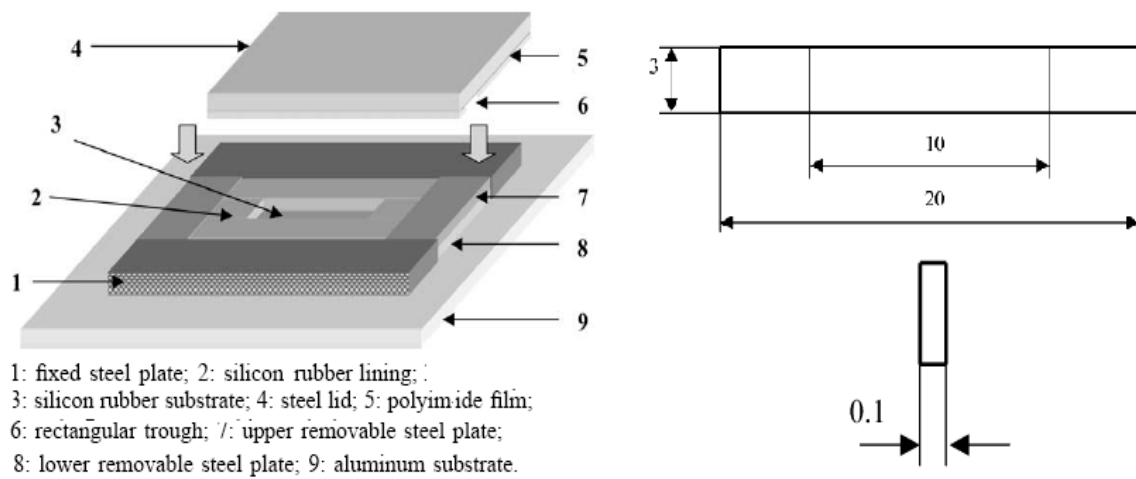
Mold and Samples used by Shi, et al. [28]
